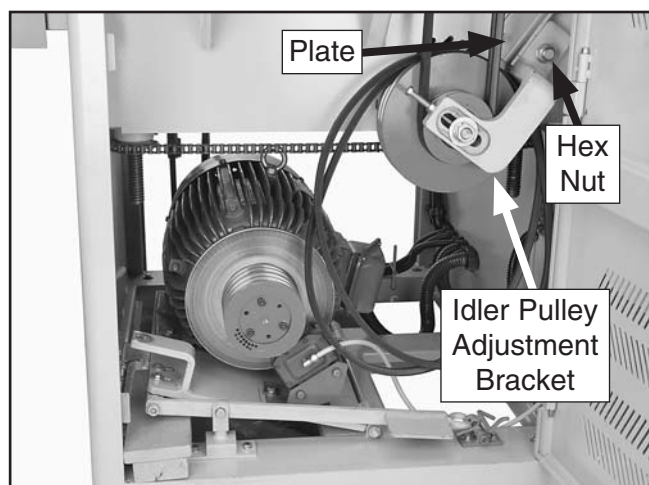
Location of hex nut securing idler adjustment bracket to frame.
